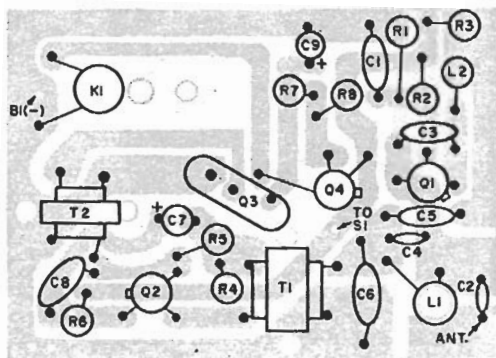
Transmitter (directly above) and receiver (below right) etching guides are shown actual size. The layouts show parts location and orientation on the boards to facilitate easy component mounting.
